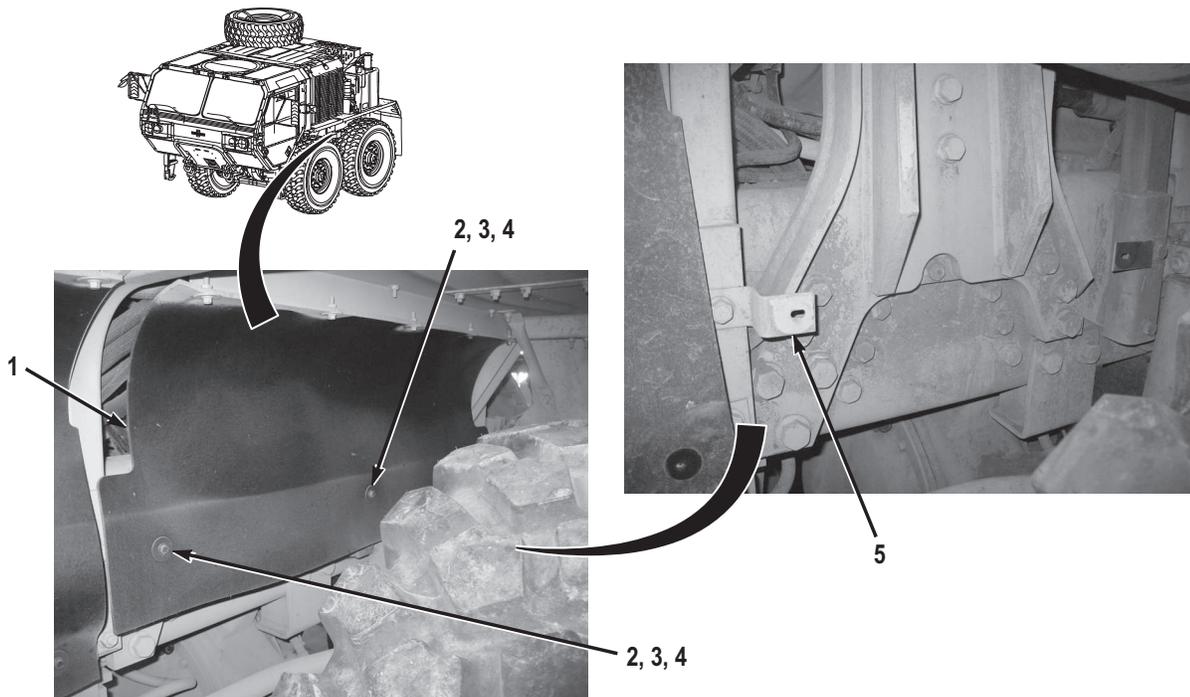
Driver And Passenger Side Rear Fender Panel Removal.
